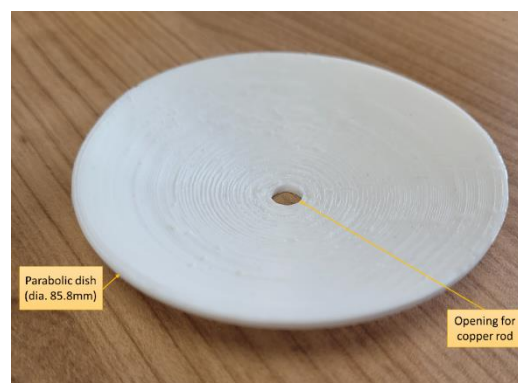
Parabolic dish that was printed using a 3D printer.
